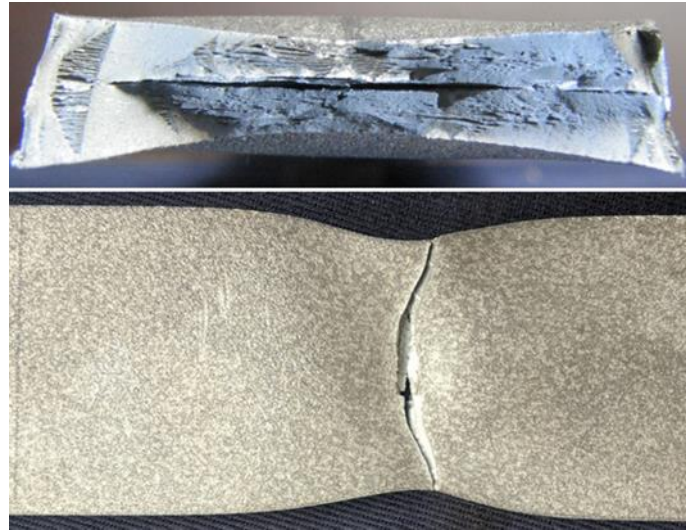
Fracture surface of static test specimen LCS-1.
